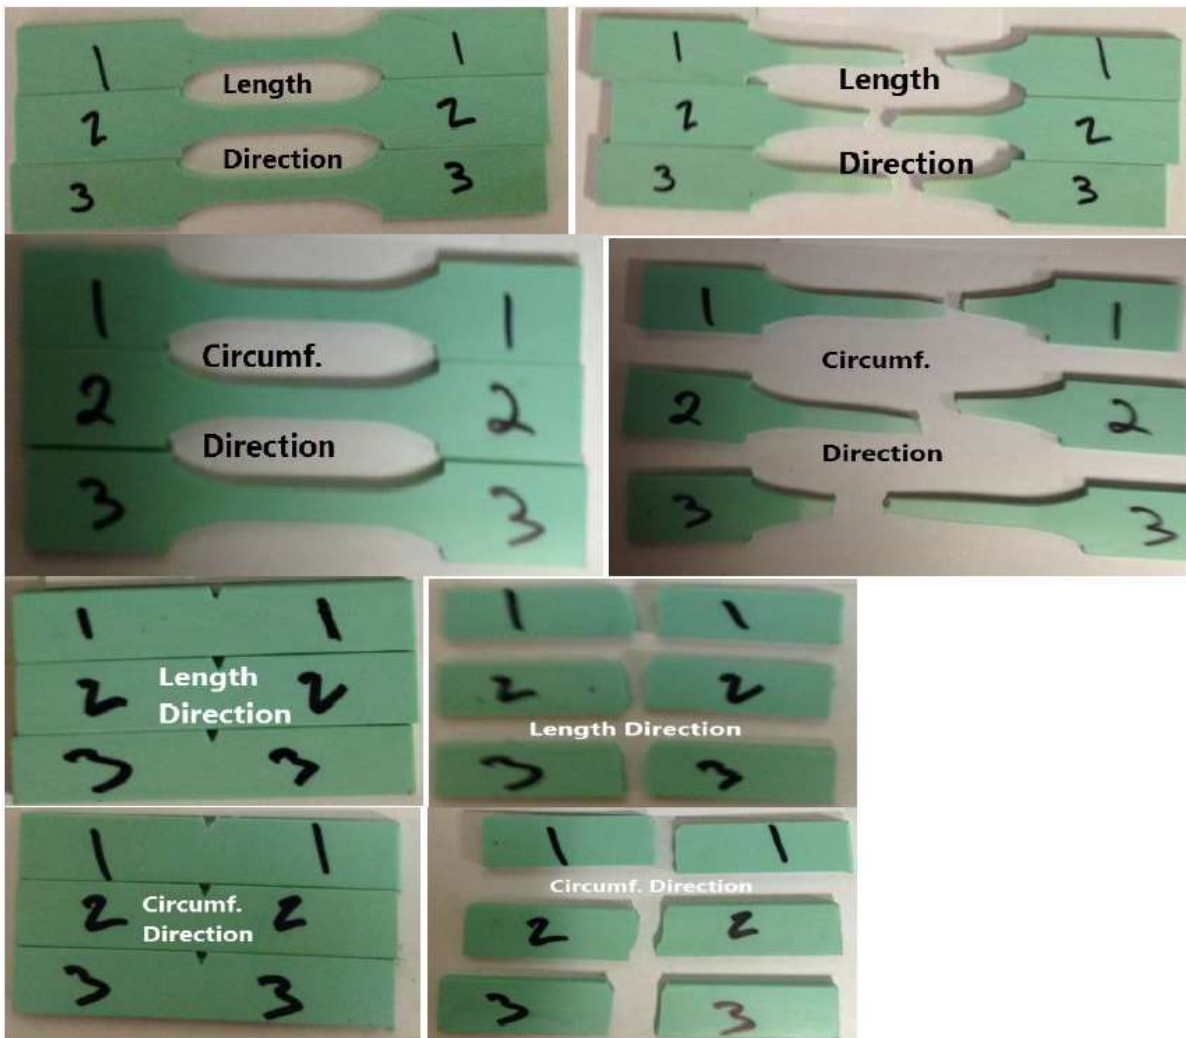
Photograph of the tensile and IZOD impact test bars before (left) and after (right) testing. Test results reveal that the pipe material is strong and exceeds minimum strength specifications.
